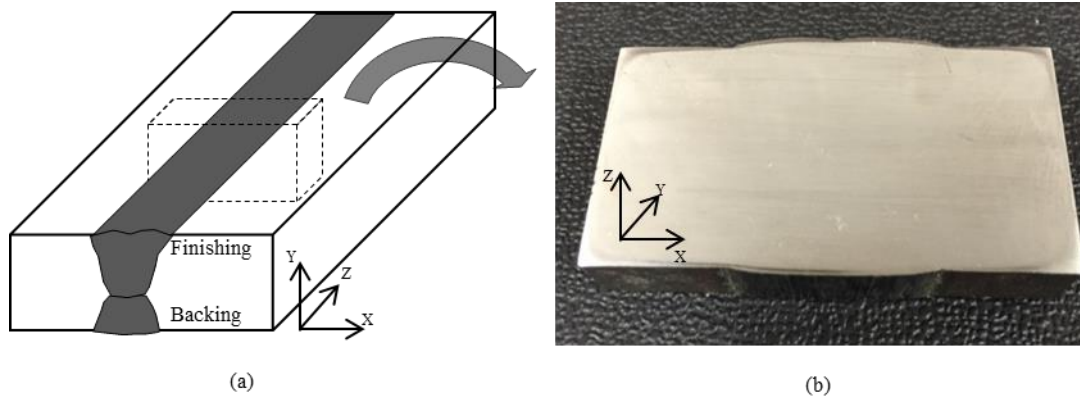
(a) Schematic of SAW thick plate with finishing and backing bead contour. The steel dimensions are 26.8 mm × 200 mm × 1 m; (b) picture of the weld cross-section sample extracted from the SAW API X70 steel as illustrated in (a). The specimen dimensions are 49 mm traverse (X-axis), 9 mm longitude (Z-axis), and 26.8 mm height (Y-axis).
